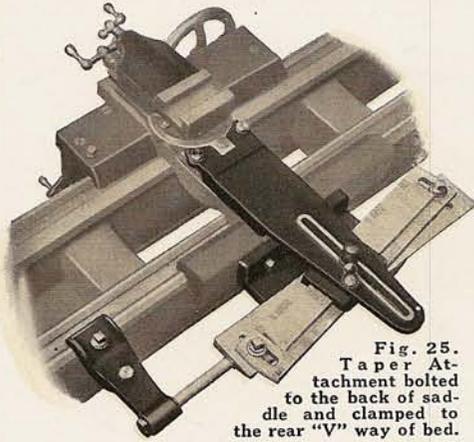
Taper Attachment bolted to the back of saddle and clamped to the rear "V" way of bed.
